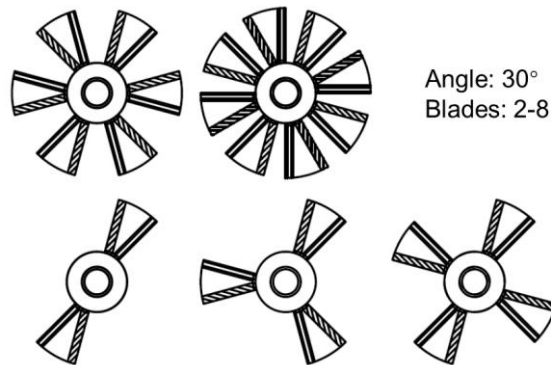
Impeller geometry with difference number of blades. The impellers equip with 2 to 8 blades (30°).
